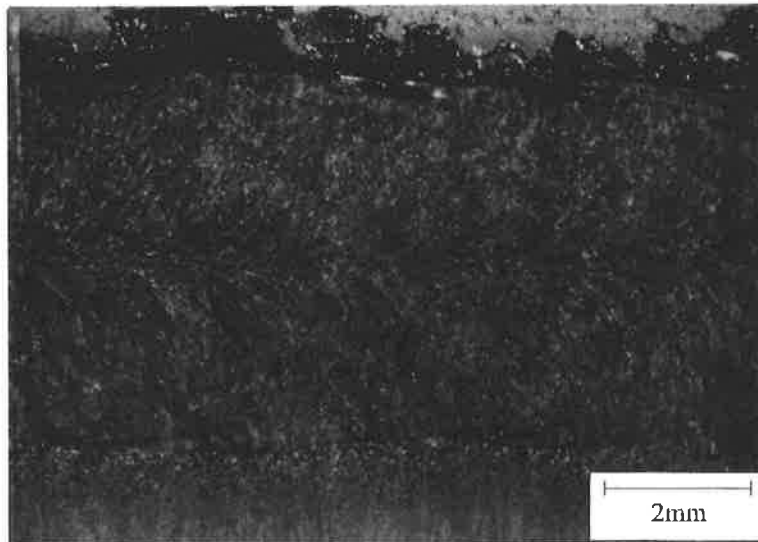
Longitudinal horizontal section of a weld made at 300mm/min and 142A (heat input equal to 0.71kJ/mm). No hollow bead formed in this weld.
